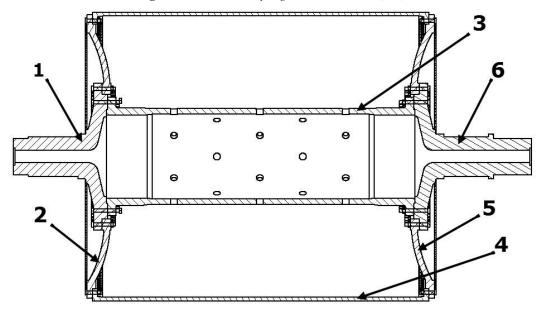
Section A-A of the Yankee ensemble; 1 and 6 - spindles, 2 and 5 caps, 3 - inner cylinder, 4 - outer cylinder [11]
